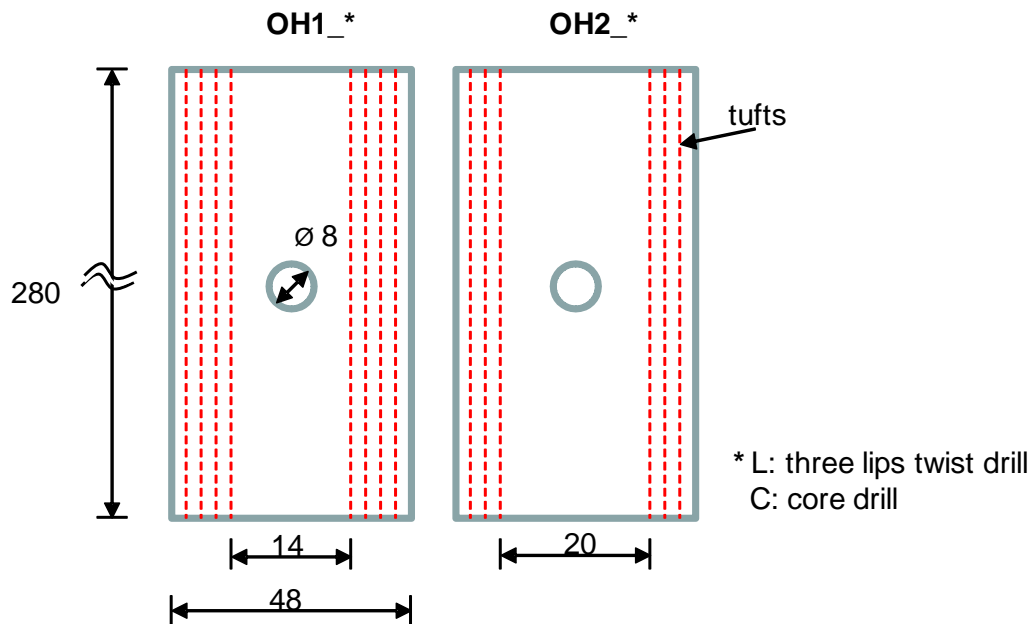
Schematic illustration of the tufted open-hole samples.
